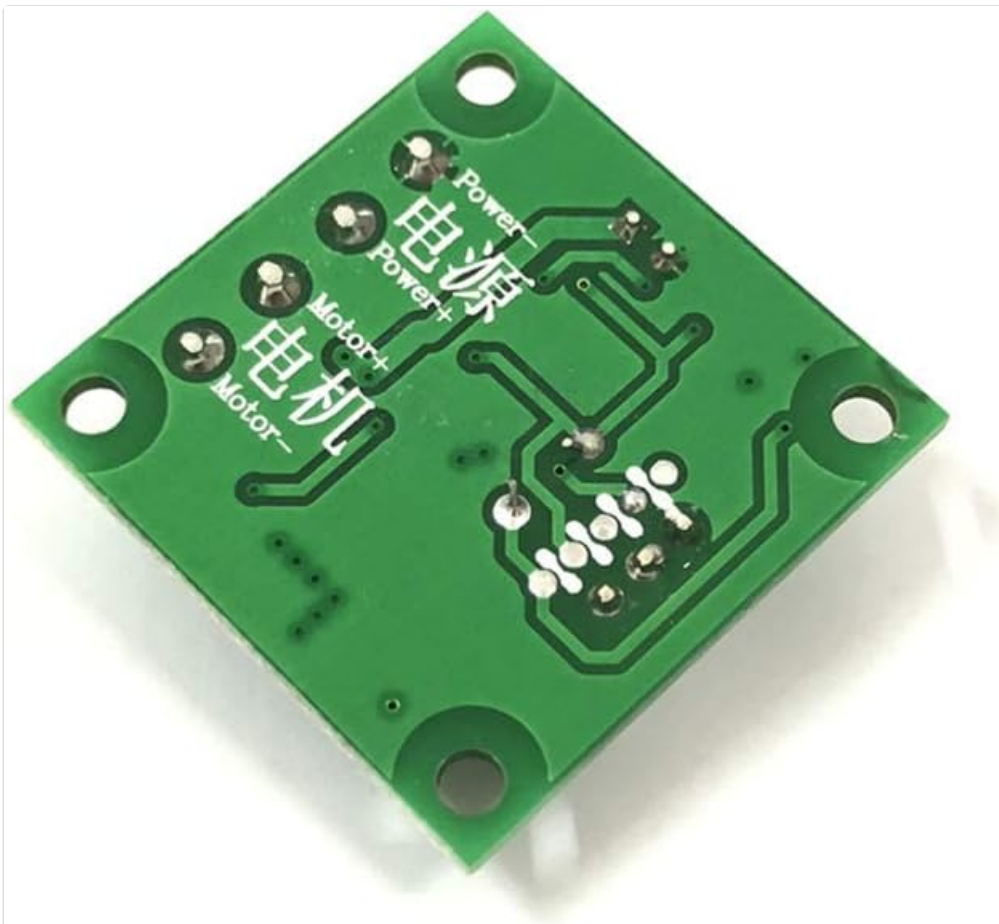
Bottom view of the controller module, indicating the power input and motor output solder pads. The labels 'Power+' and 'Power-' are for the DC power supply, and 'Motor+' and 'Motor-' are for the DC motor connections.
